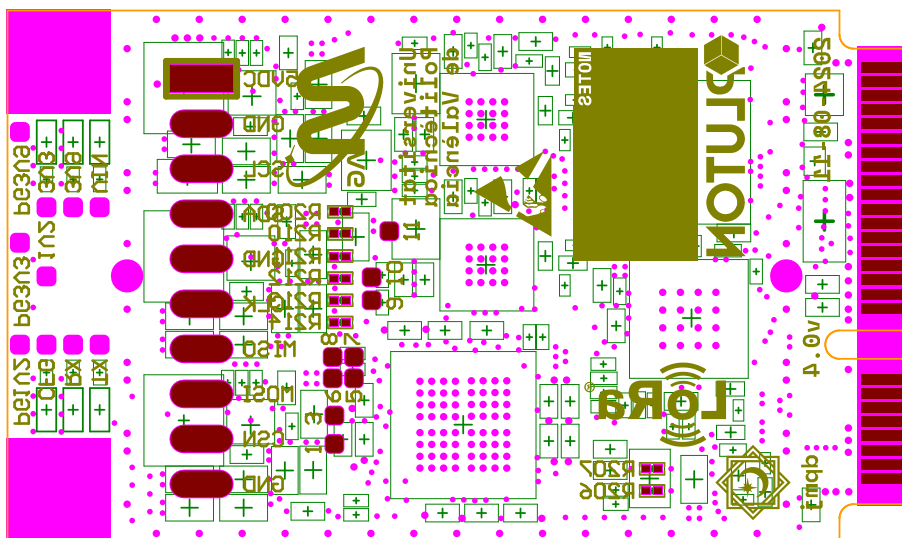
LoRa module: PCB prints. Top copper (L1), silkscreen, solder, and signal 1 (L3).
